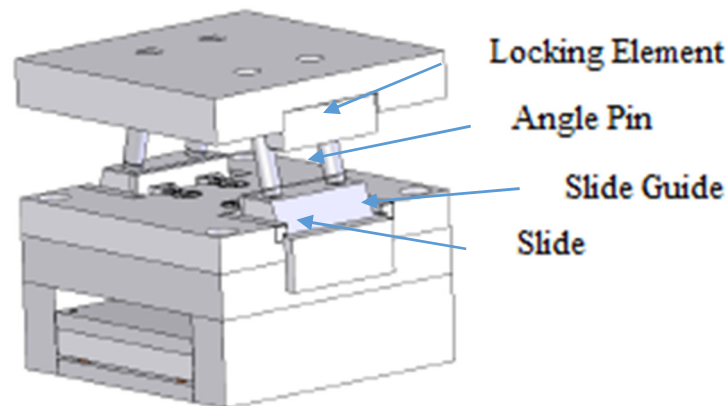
Slide Mechanism (DS, Standard Components, 2008)
